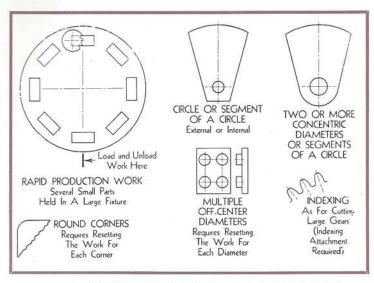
Basic Types of work which can be handled with the aid of CINCINNATI Circular Milling Attachments.
